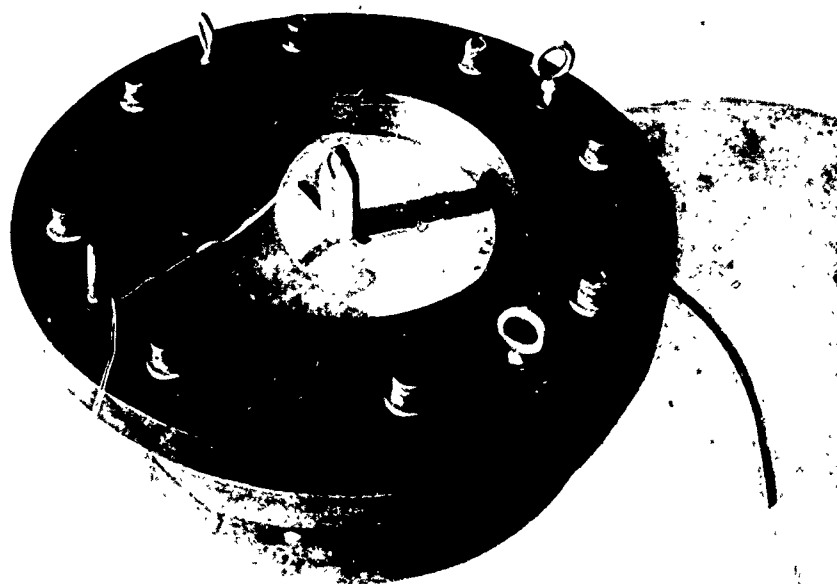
13-in.-Diameter Explosive Forming Die with a Part Blank and Explosive Charge in Place
